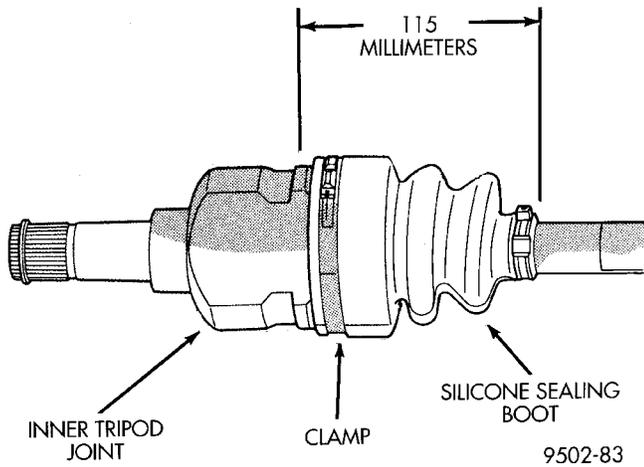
Sealing Boot End to End Length with Silicone Boot
